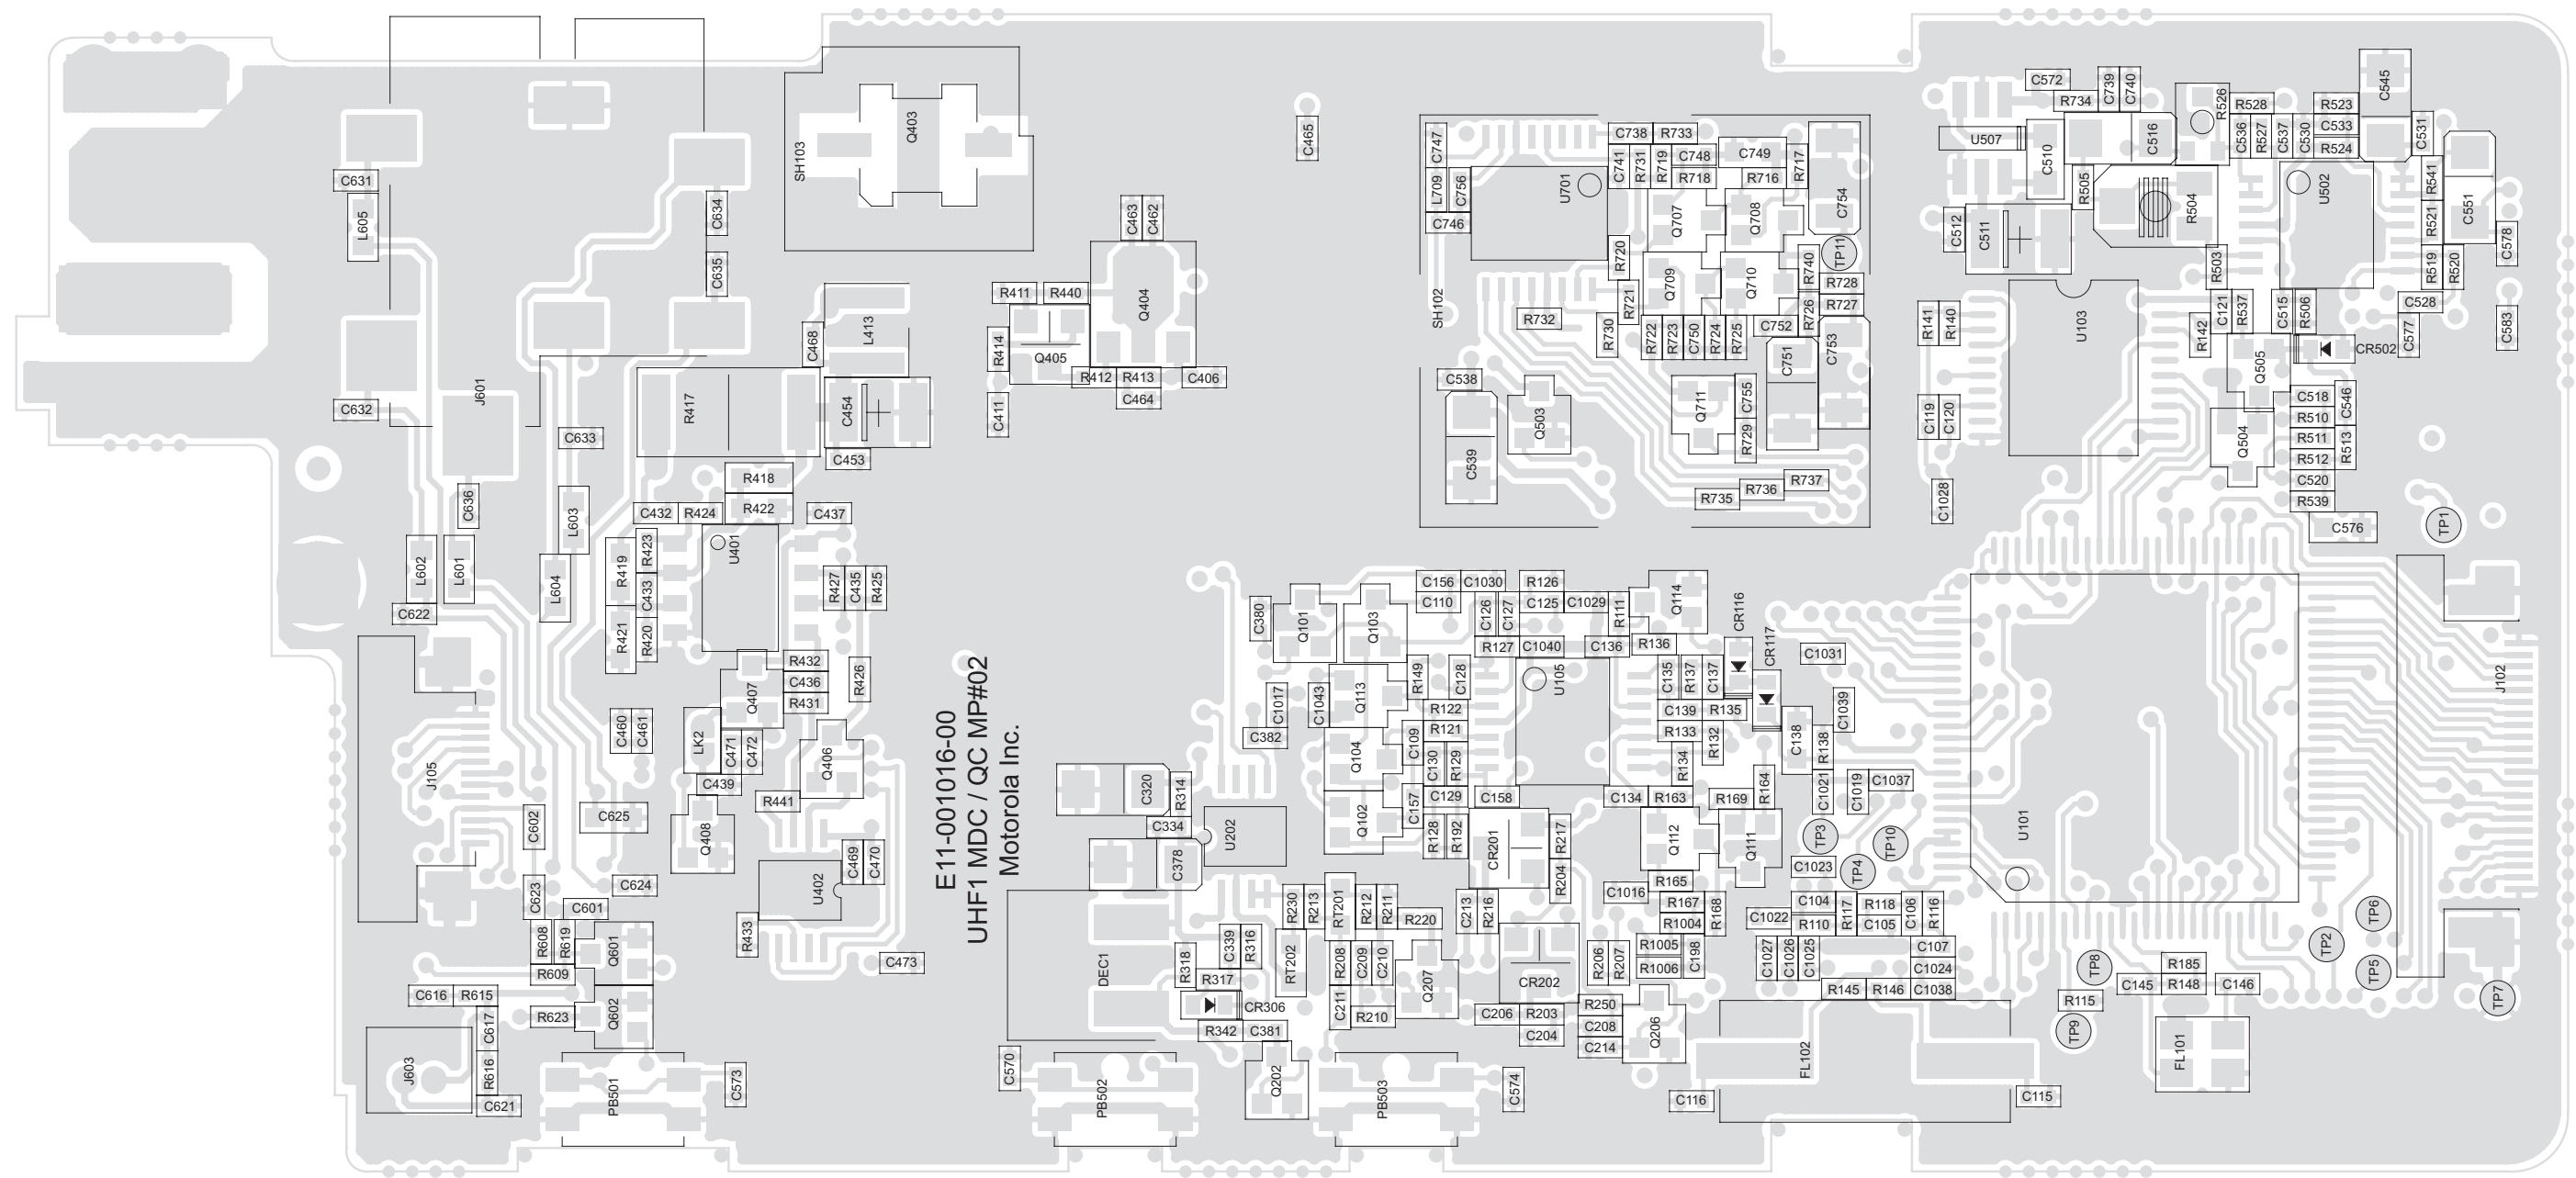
UHF1 (403–447 MHz) Mainboard Top Side: PCB No. E11-001016-00
